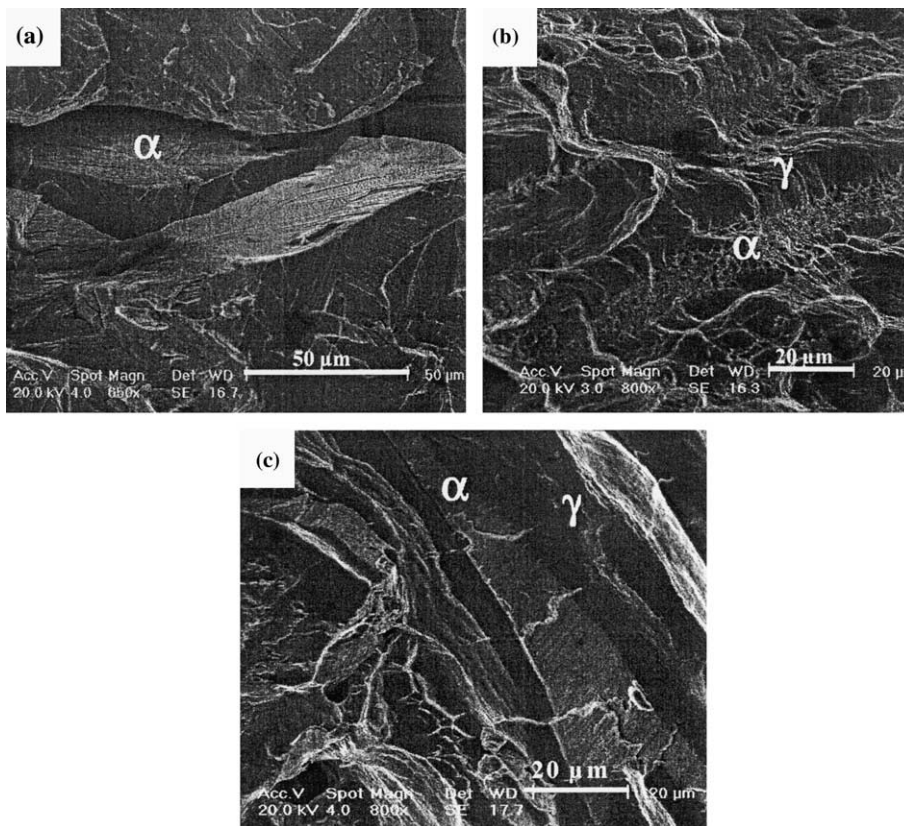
Ferrite fracture observation at 320 °C: (a) cleavage, (b) ductile, (c) shearing fracture.
